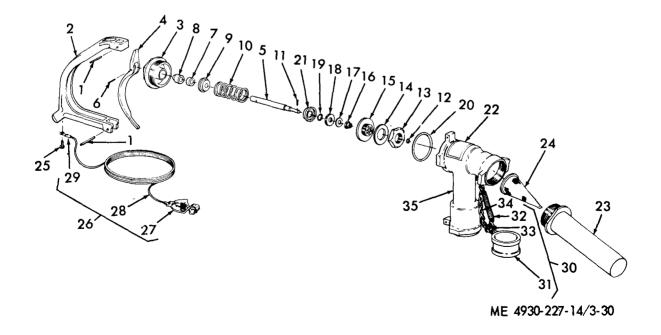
Nozzle assembly, disassembly and reassembly.
